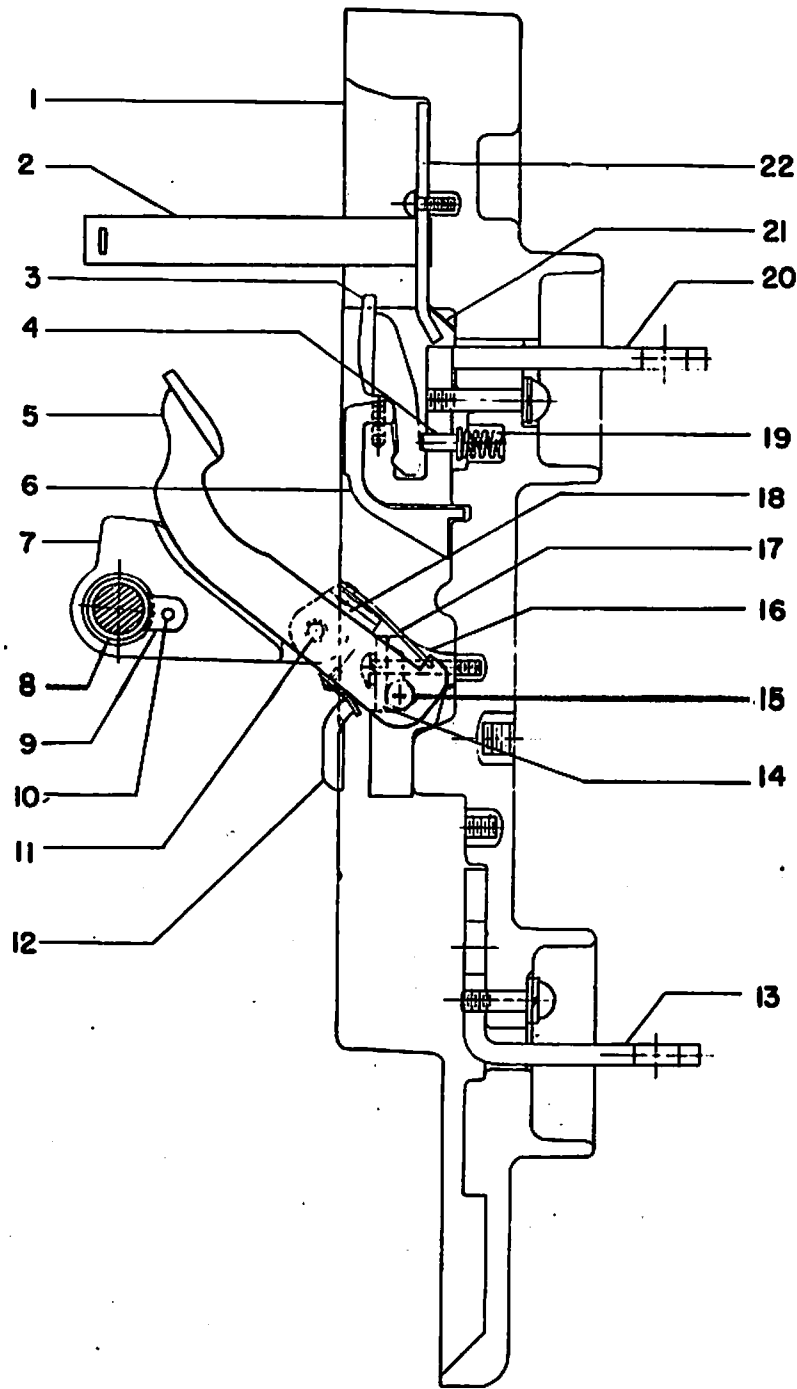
Loosening Lower Mechanism Mounting Bolts
